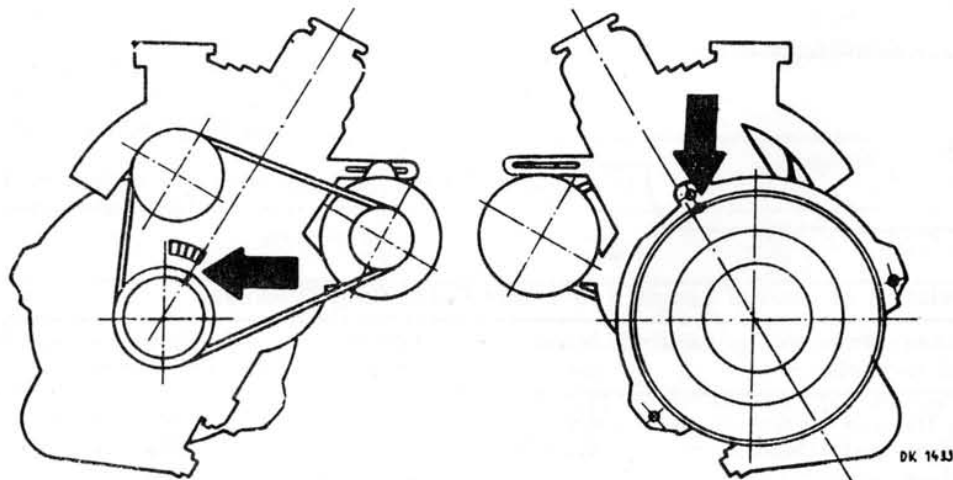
/1-Marking Correct Position of Flywheel on Crankshaft (prior to removing the flywheel)
